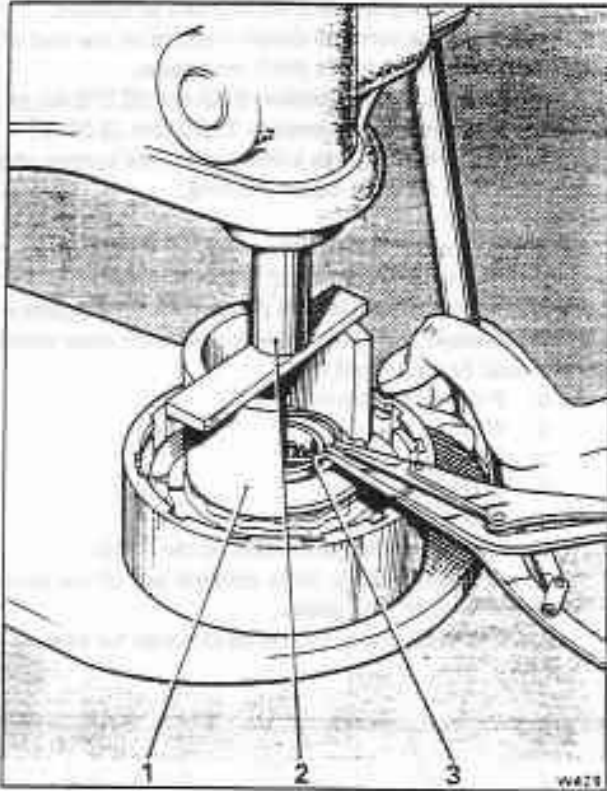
Removing and fitting the forward clutch housing snap ring
